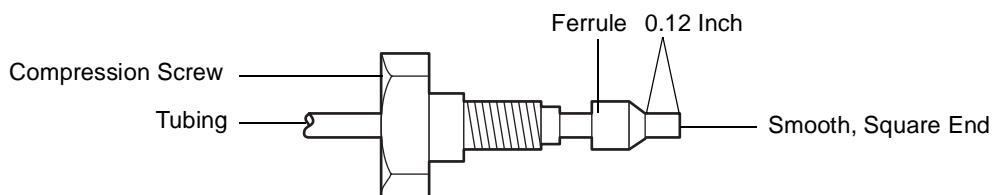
Standard Ferrule and Compression Screw Assembly
